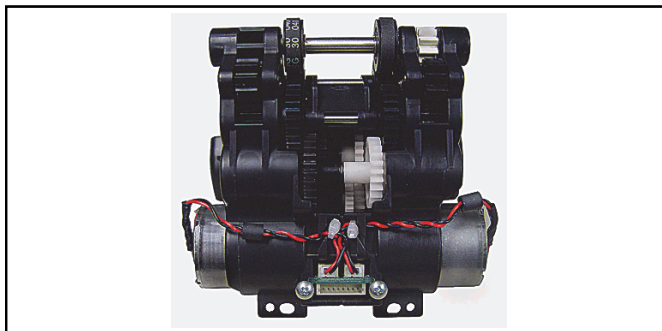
iVIZION®-100 Motor Gear Assembly (P/N 248500)
